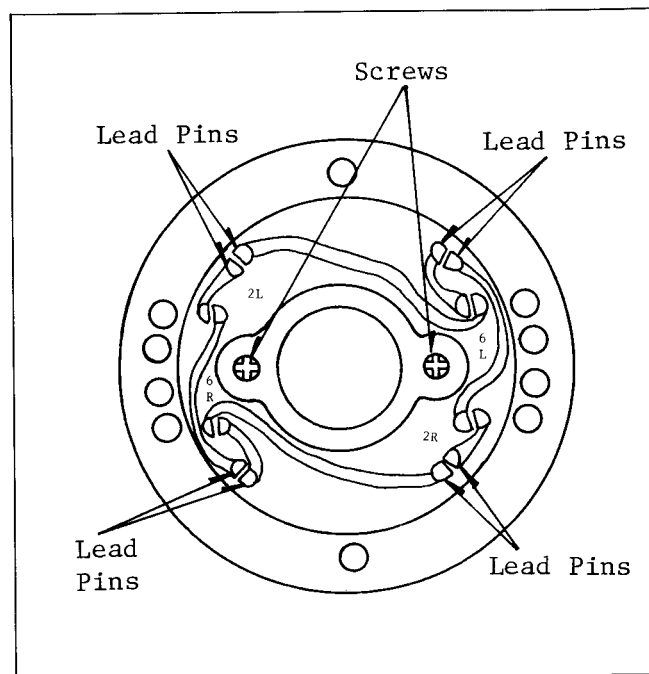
Replacement of Upper Cylinder Unit-(1)
